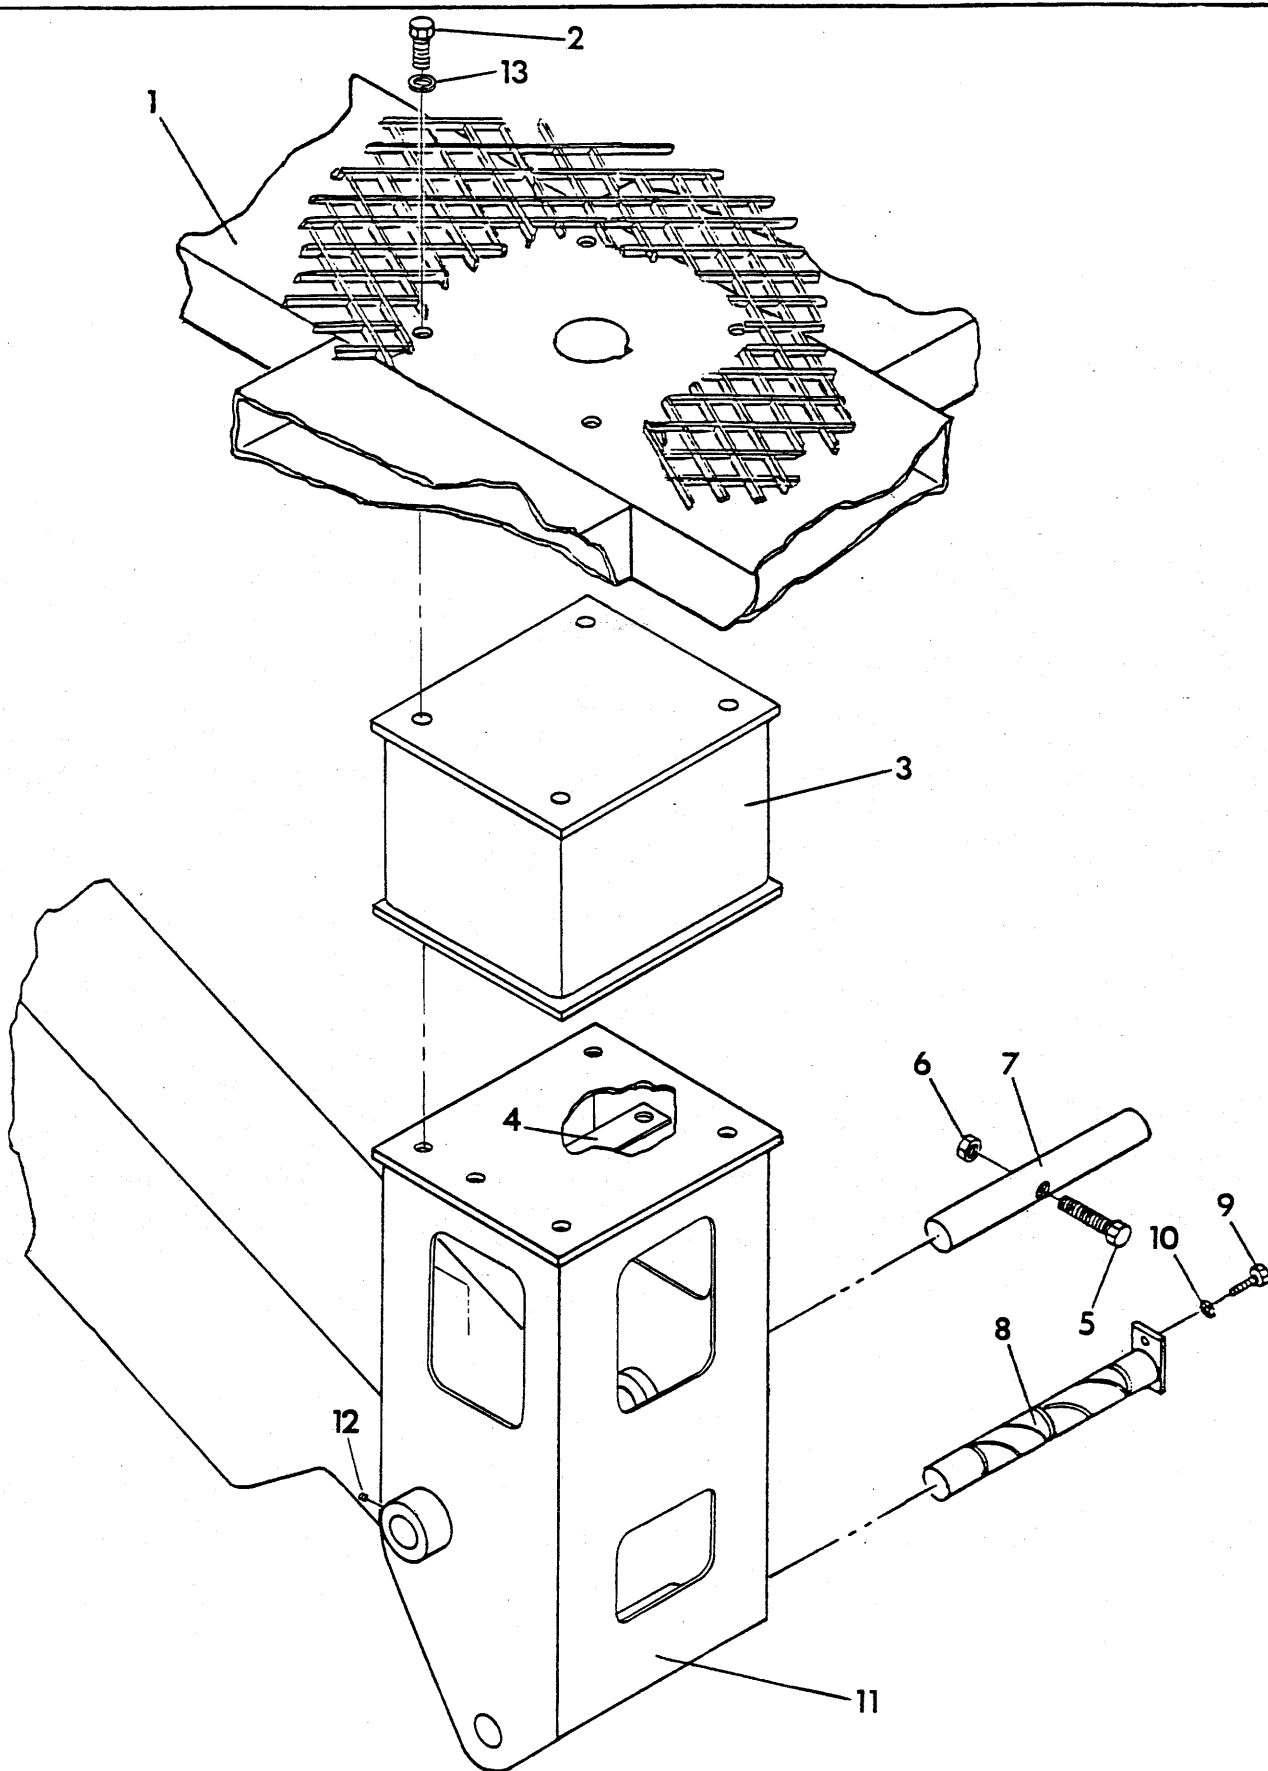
PLATFORM ASSEMBLY- NON-ROTATION
